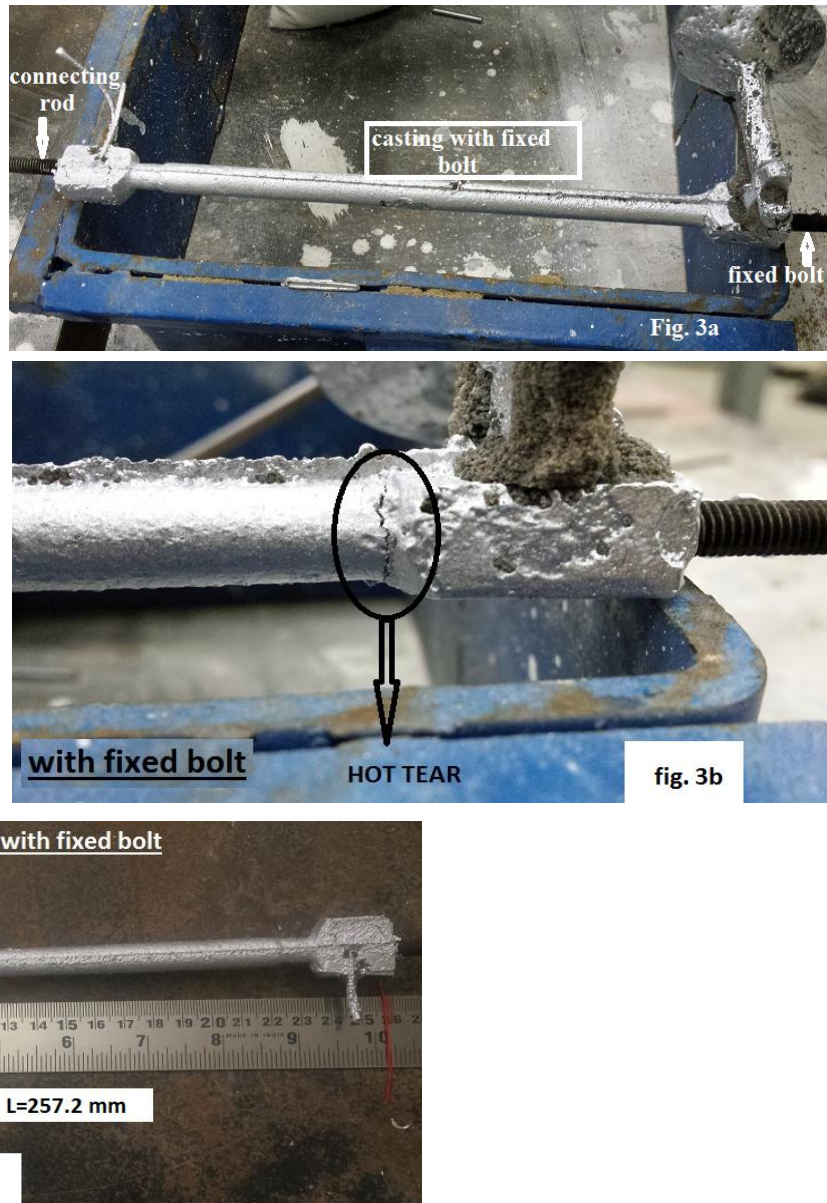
a) Shape of casting part, b) Hot tearing in the rod, c) Size of the casting
